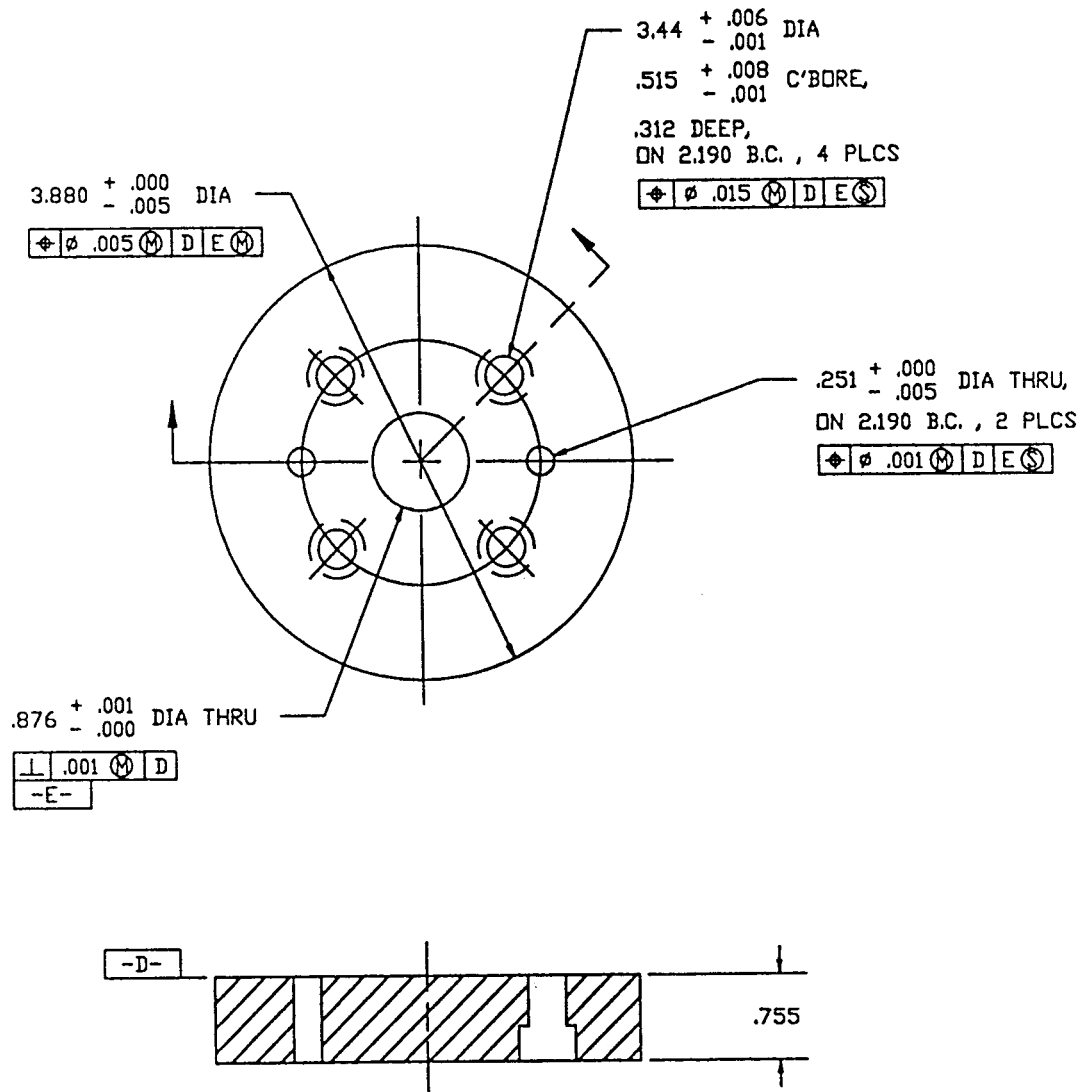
Insert for the Shear Fixture in Inch-Pound Units
